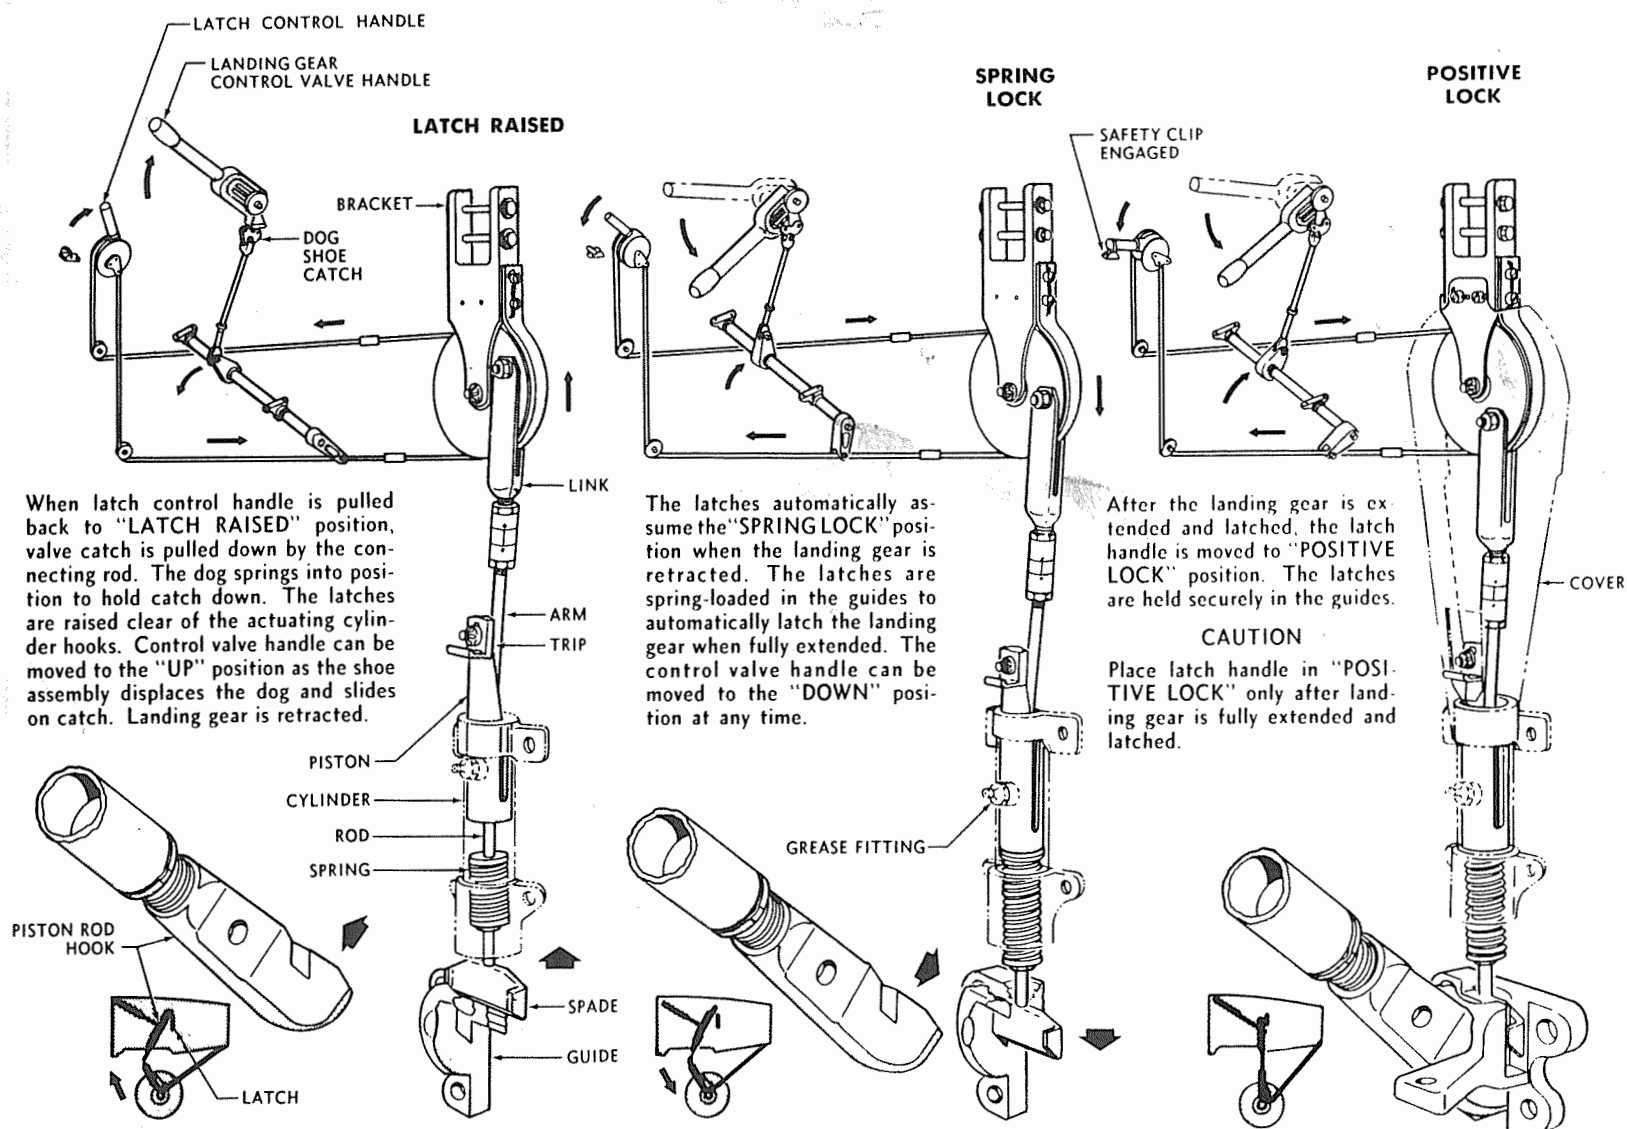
(Sheet 4 of 7 Sheets). Mechanical Safety Latch Control System - Latch Sequence
